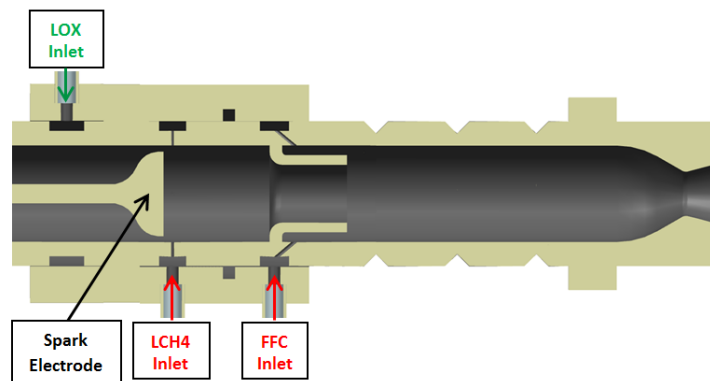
Cross sectional view of the RCE assembly for test purposes
